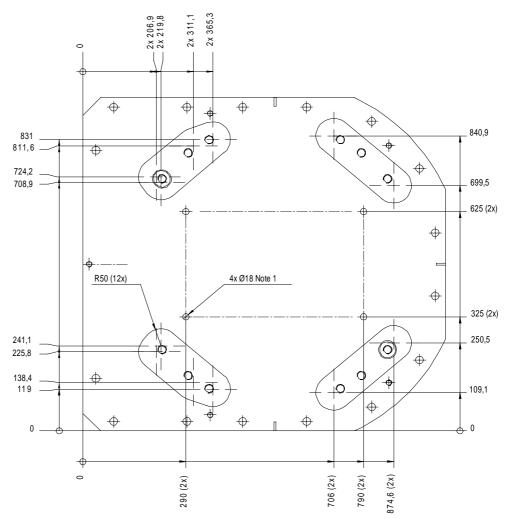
Base plate dimension print, measurements of the adaption for the robot base (dimension in mm).
